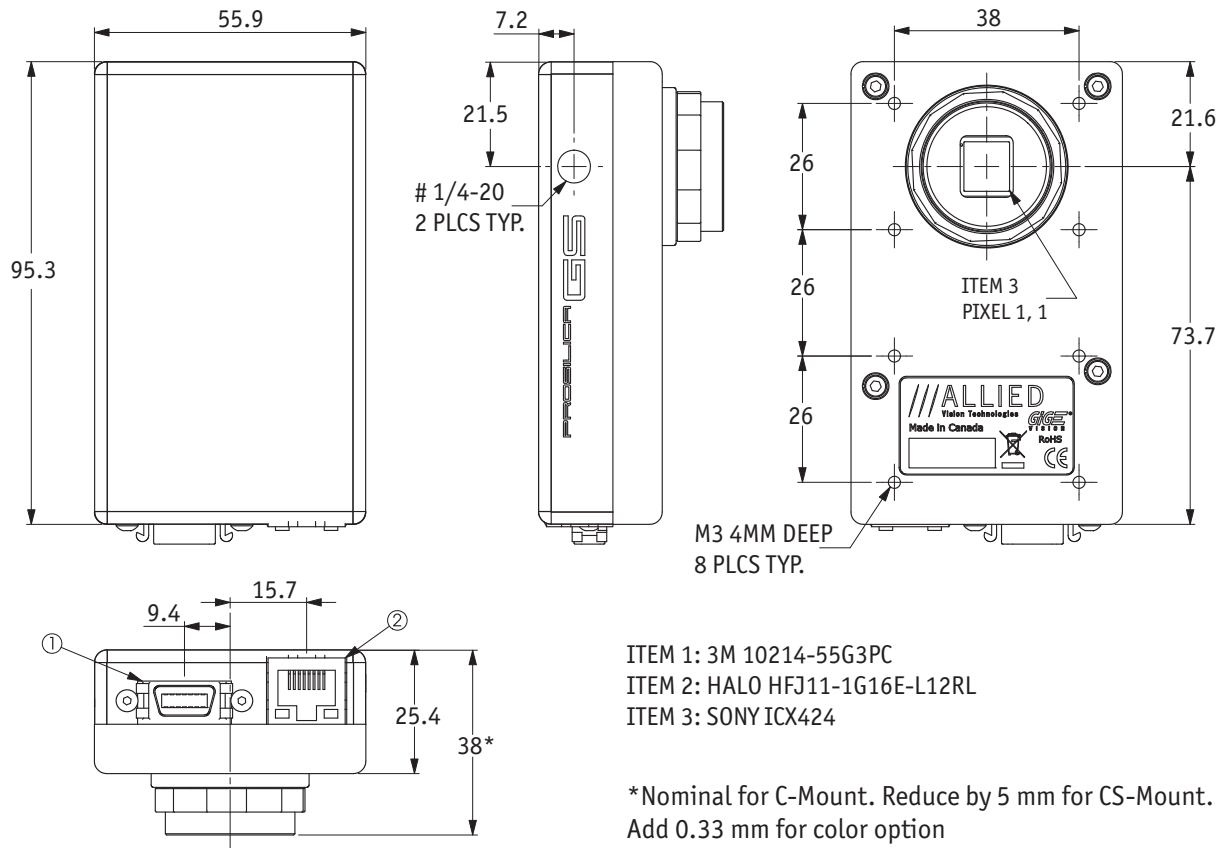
Prosilica GS650-P/GS650C-P mechanical drawing
